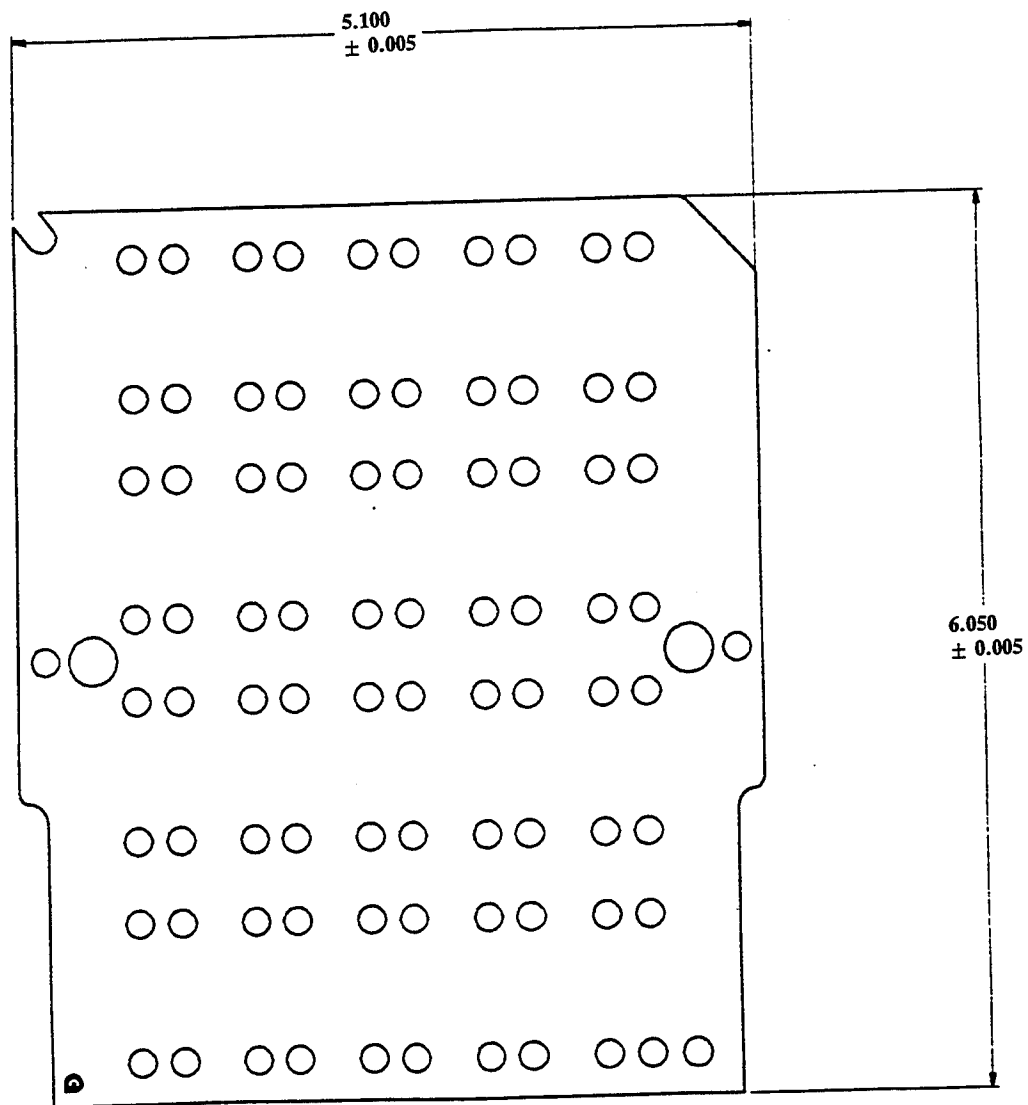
Plate "E" , Spacer/Manifold Divider Plate.
